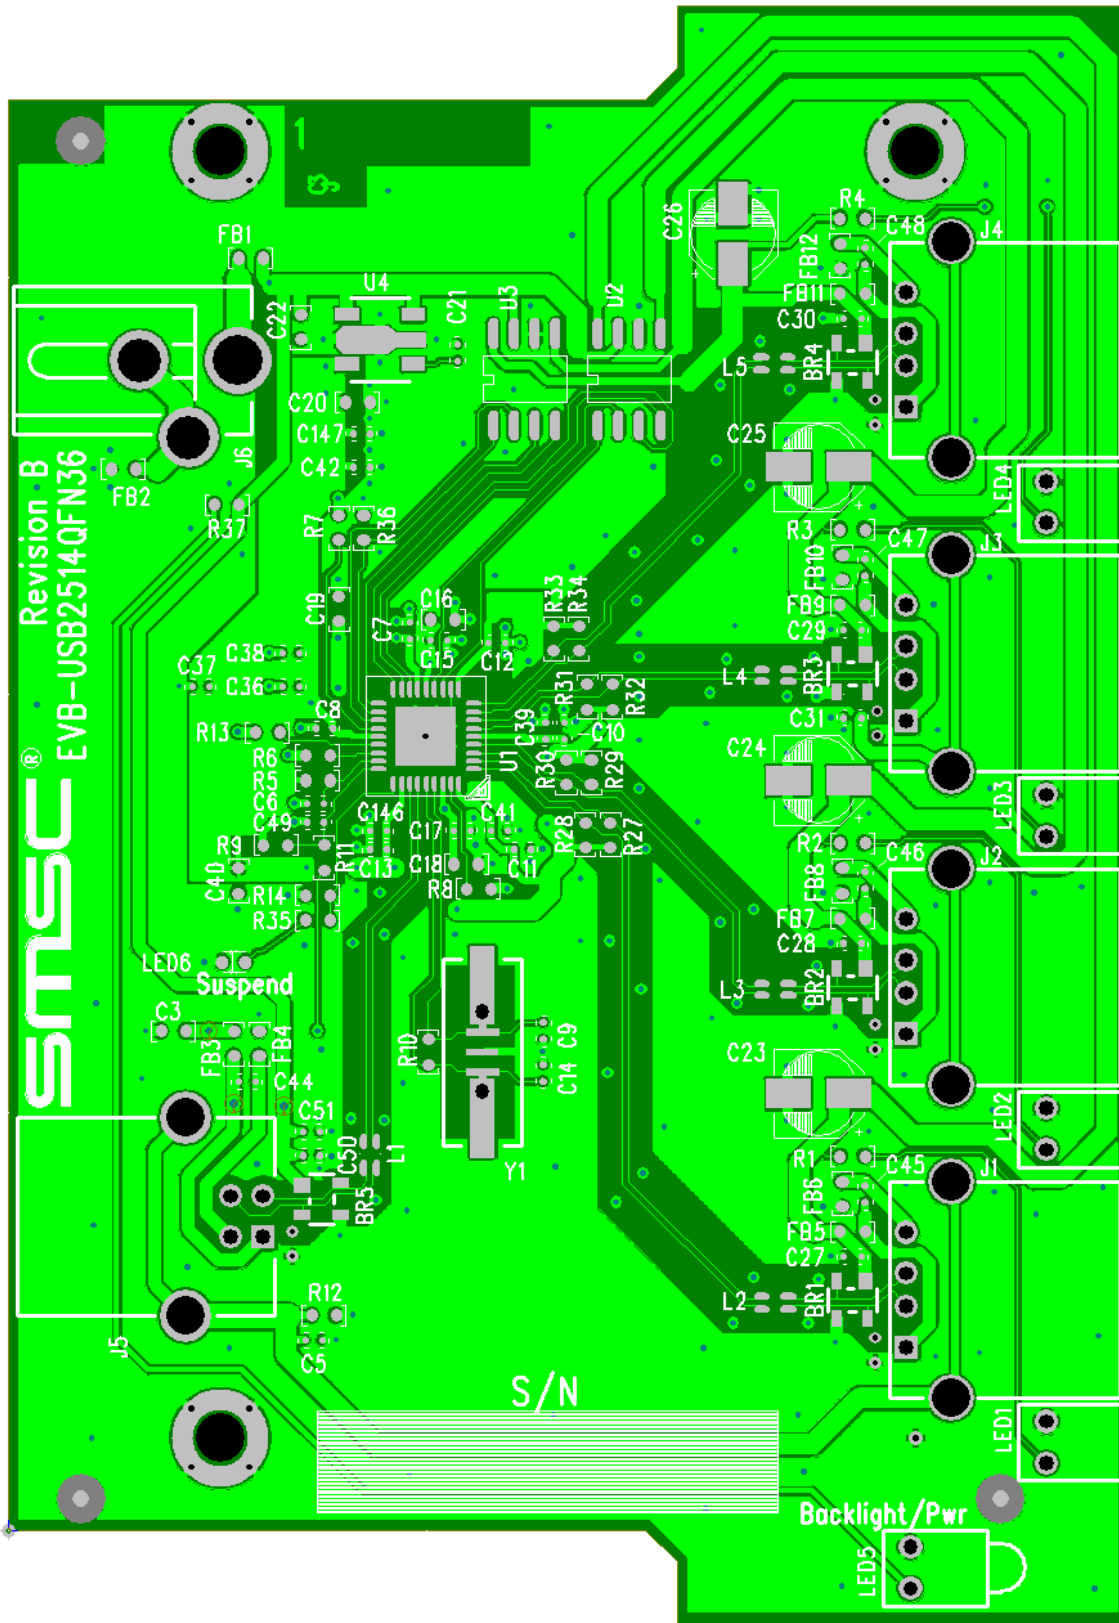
EVB_USB2514-36 Pin Component Side Top Layer
